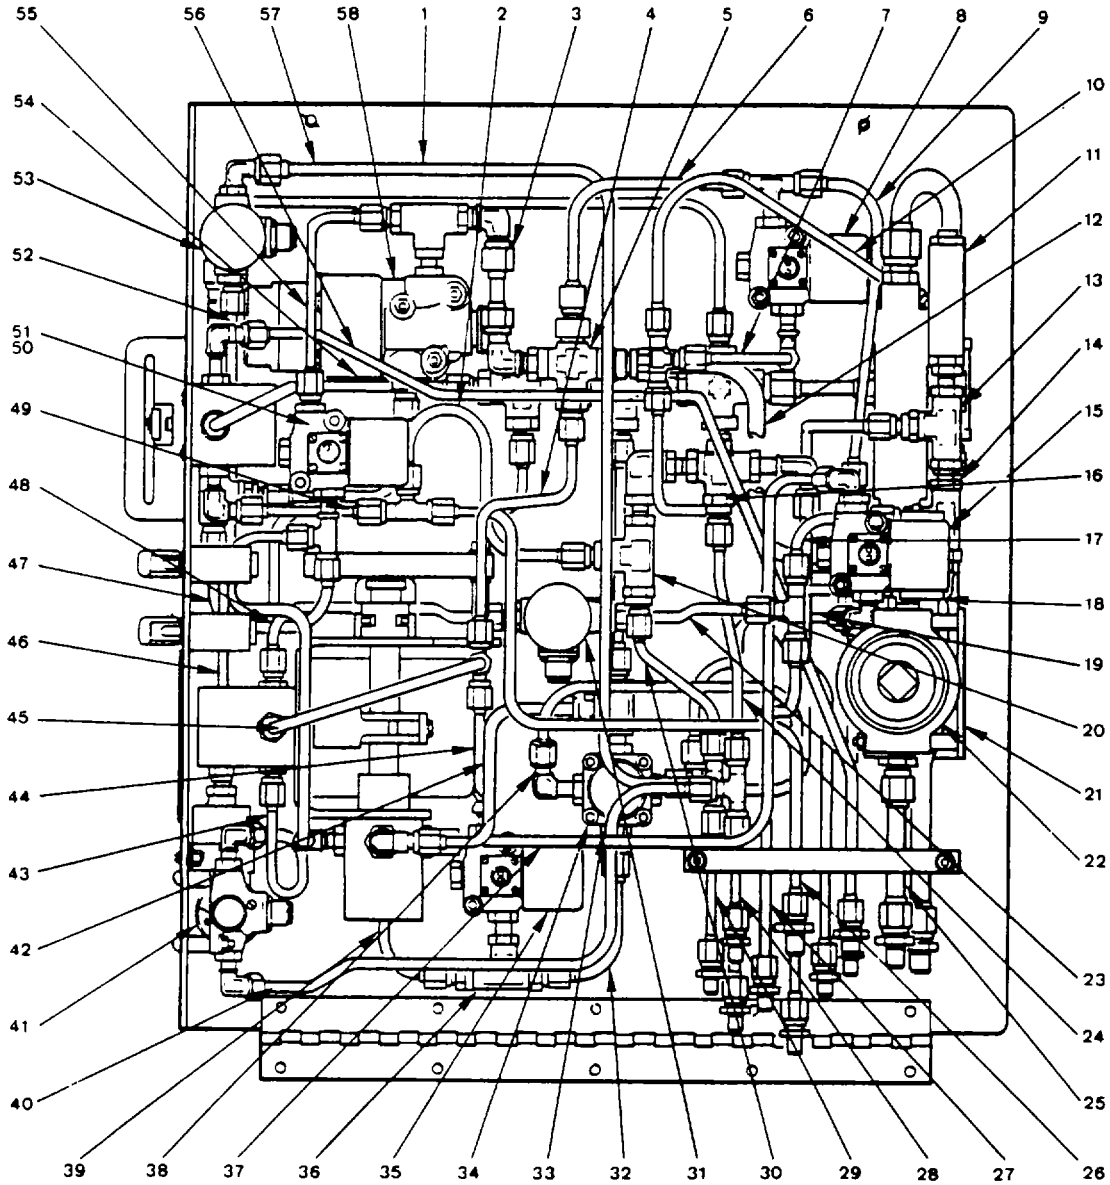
Hydraulic Control Console - Bottom View (Sheet 1 of 3).
